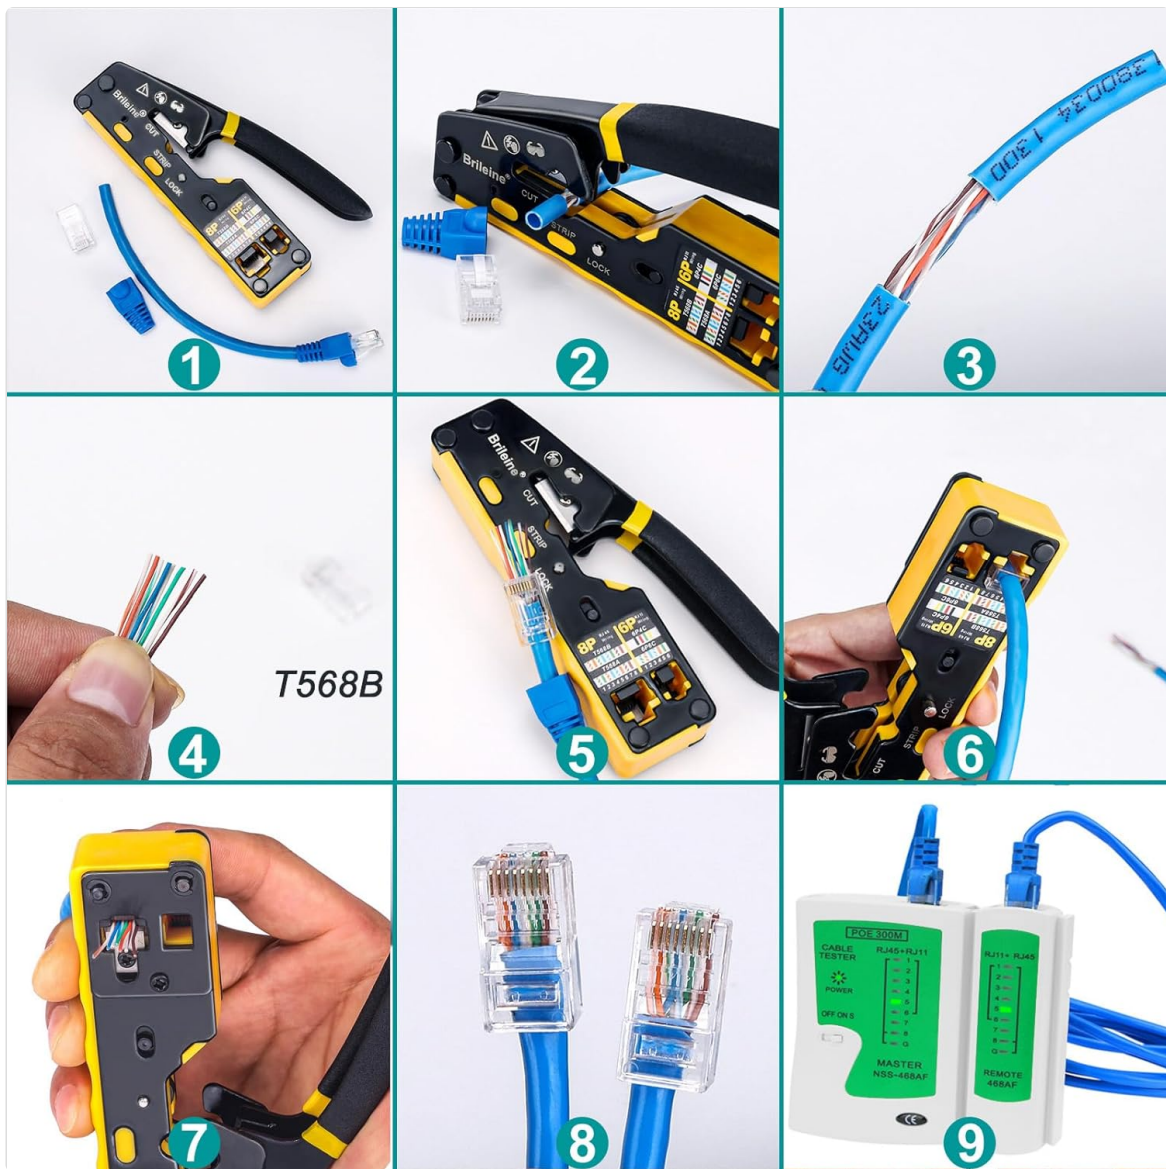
Step-by-step visual guide for crimping an RJ45 connector, from cable preparation to final inspection.
